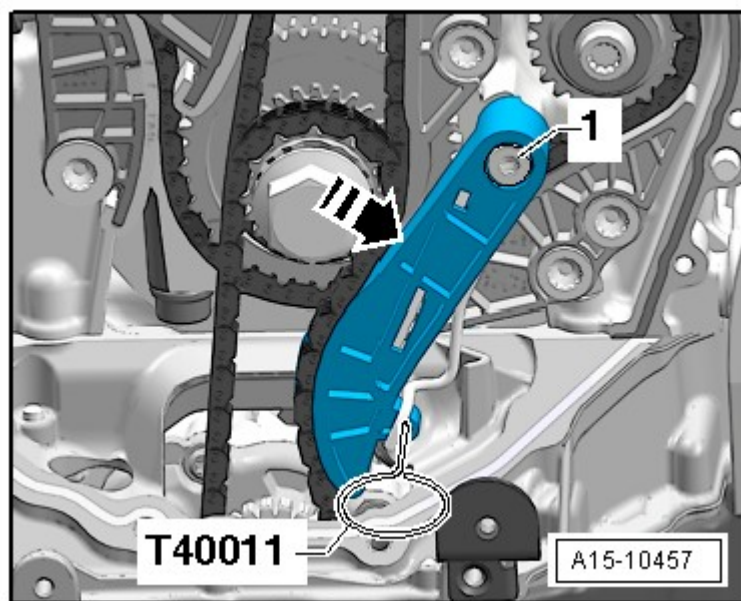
Identifying Oil Pump Chain Tensioner And Locking Pin T40011
